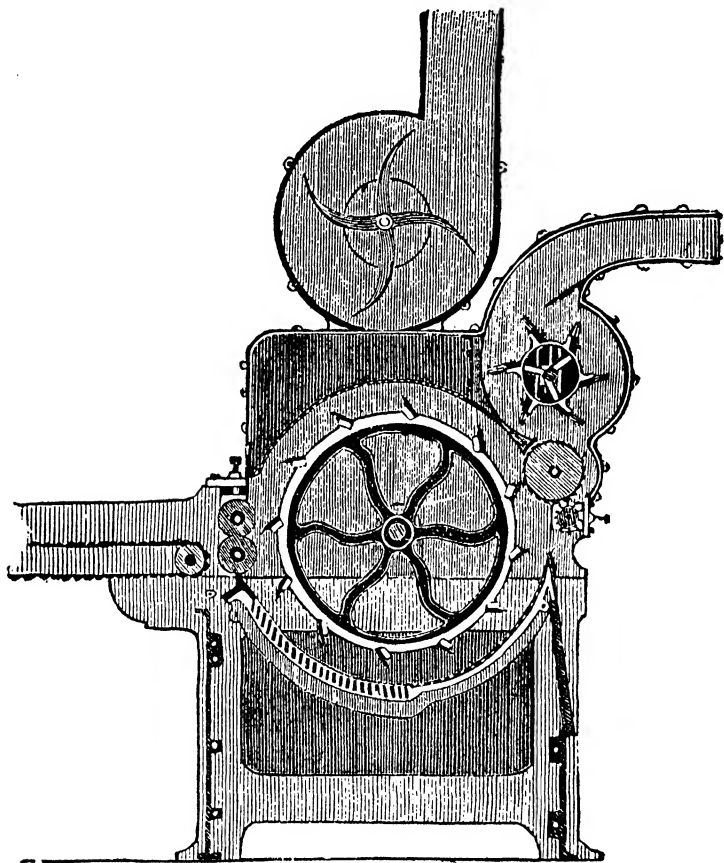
Working Parts of the Burr Picker as built by Calvert & Sargent, Graniteville, Massachusetts, under a patent of 1861.
